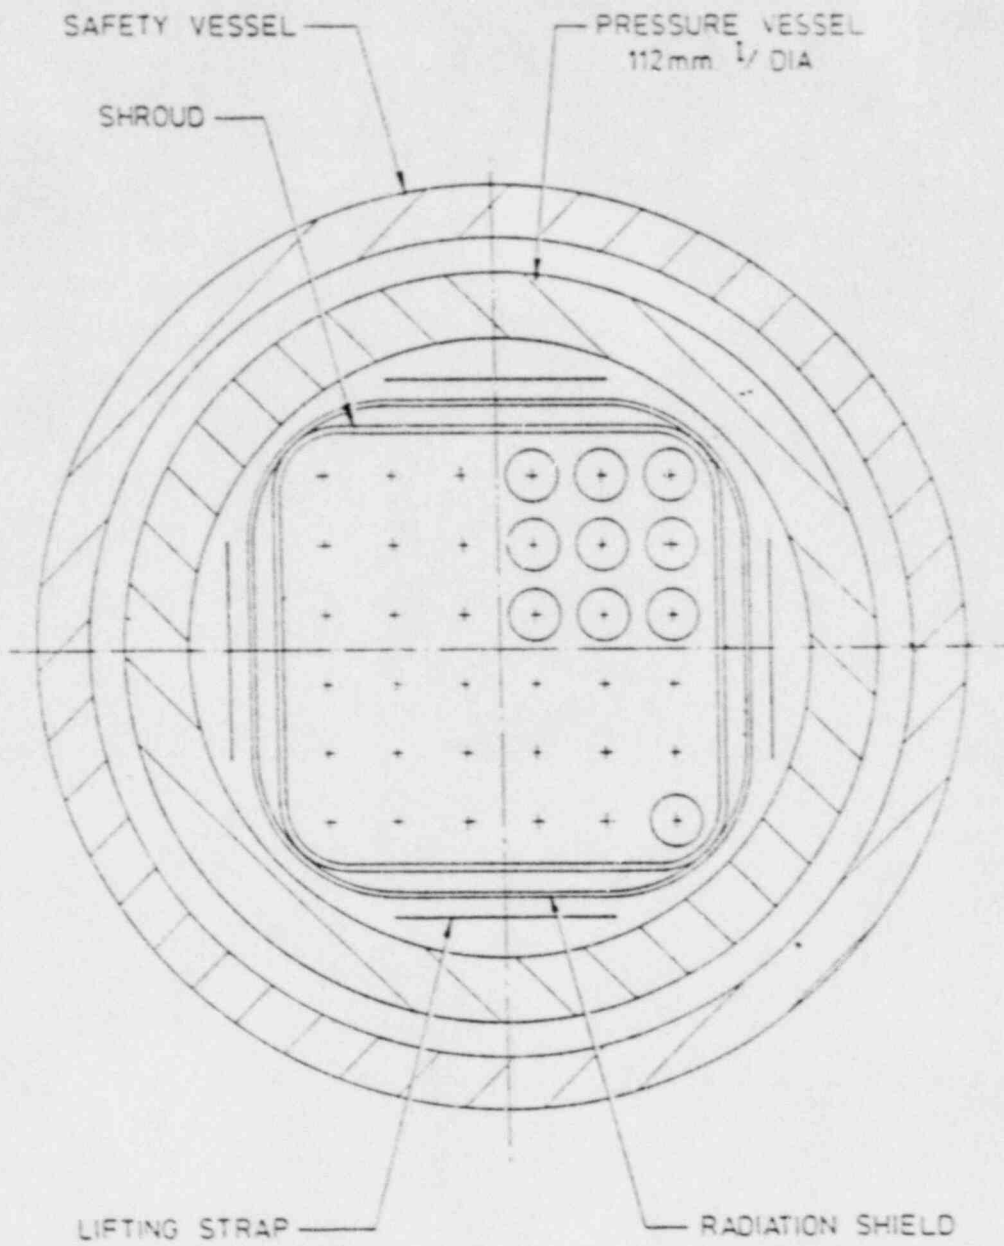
Horizontal cross section of SUPER-SAKA test section.
